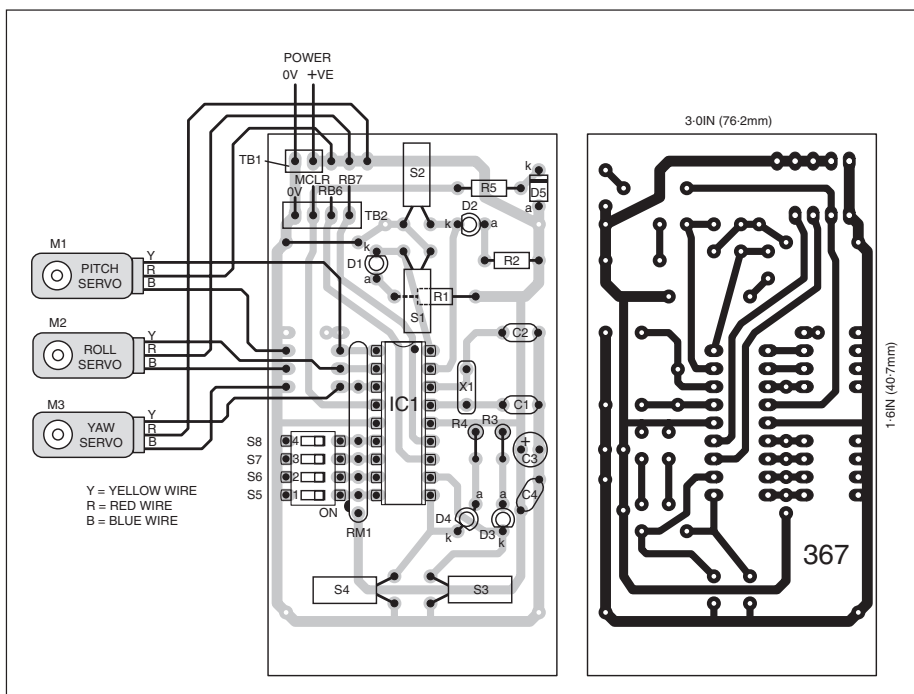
Freebird printed circuit board component layout, wiring details to servo motors and full-size copper foil underside master pattern.
